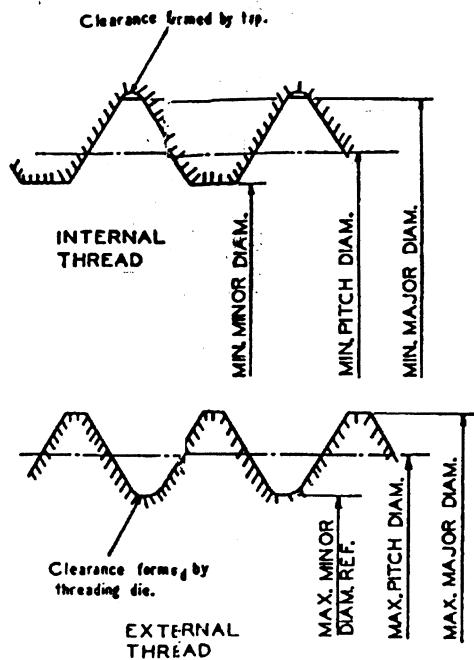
Thread dimensions to be determined for a special thread.
